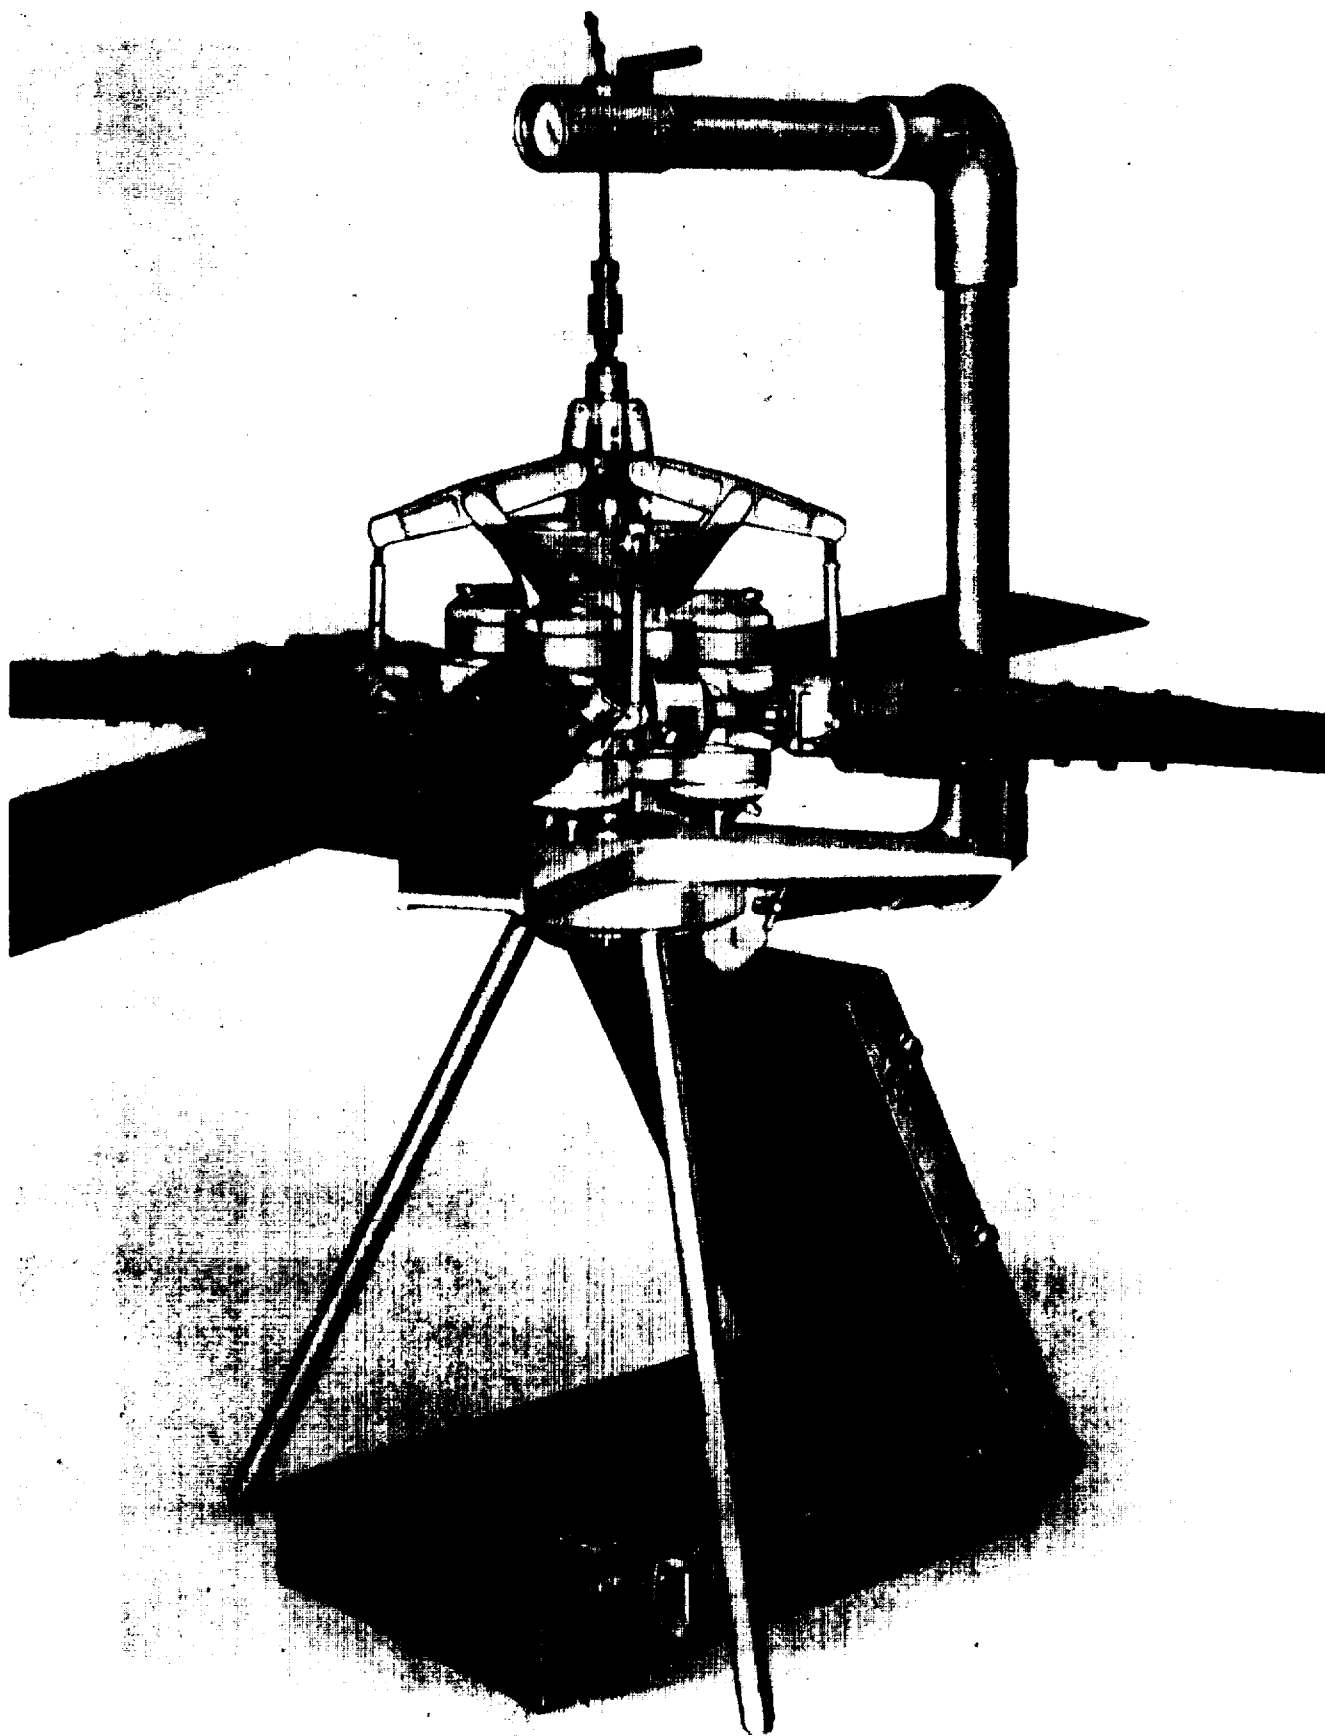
Typical Balance Checking Set-up - Two-bladed Helicopter Tail Rotor Assembly.
